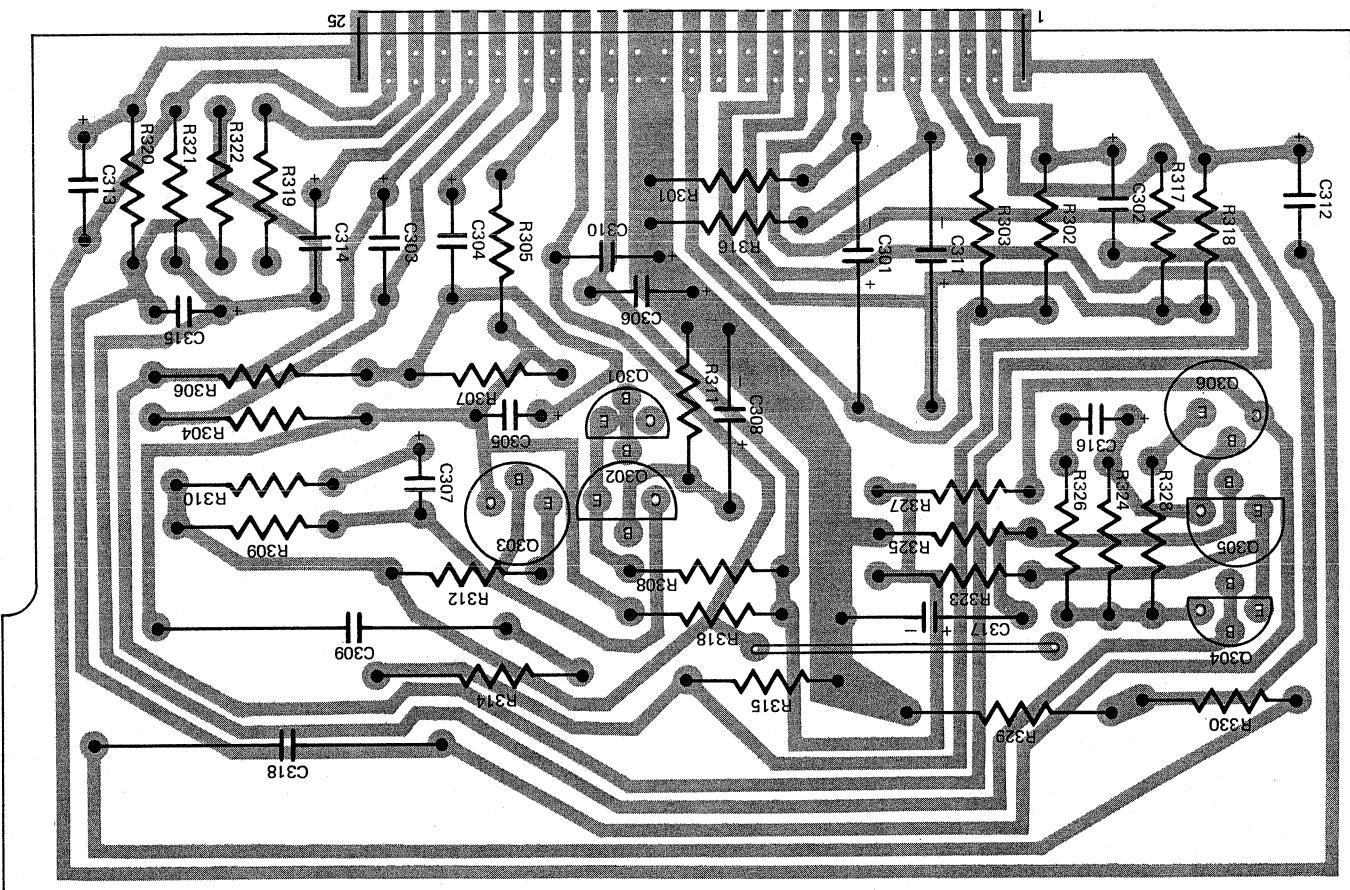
Power Amplifier Board – A5/A6 Component Assembly Diagram
